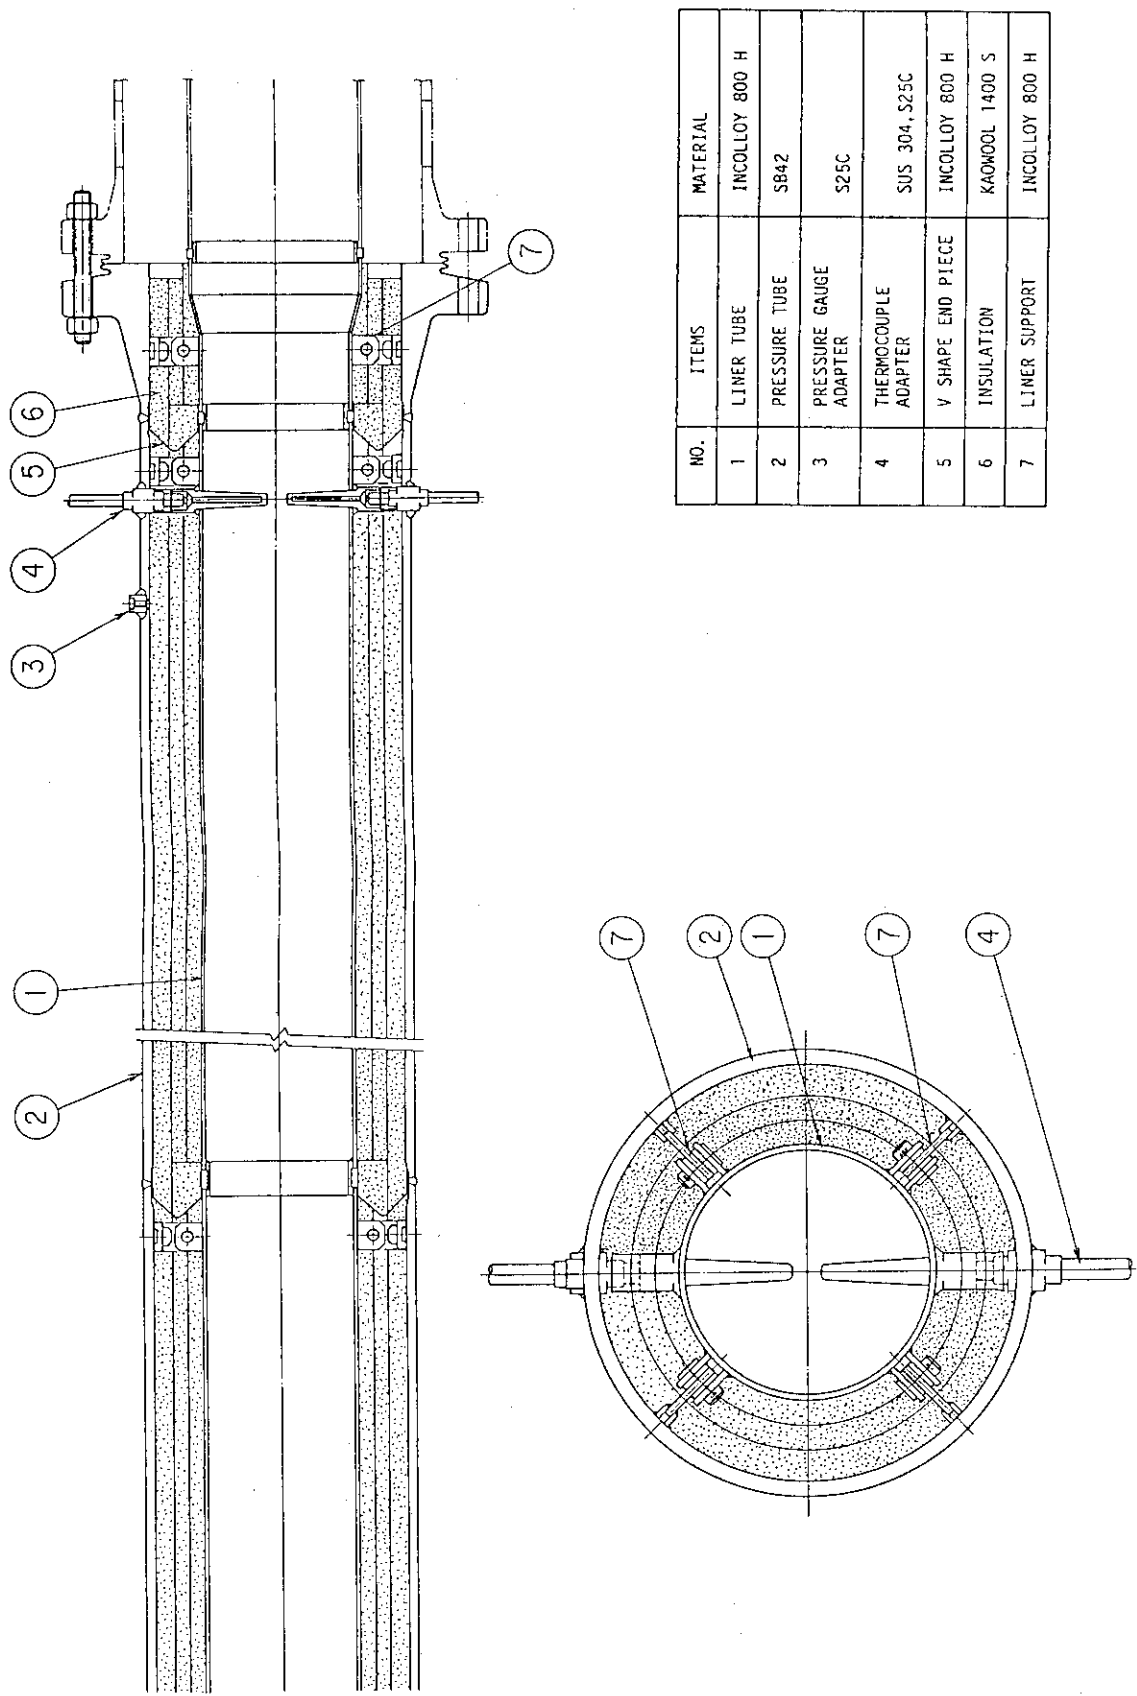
(a) Cross Sectional View of New Hot Gas Duct (Inlet Side of T2)
